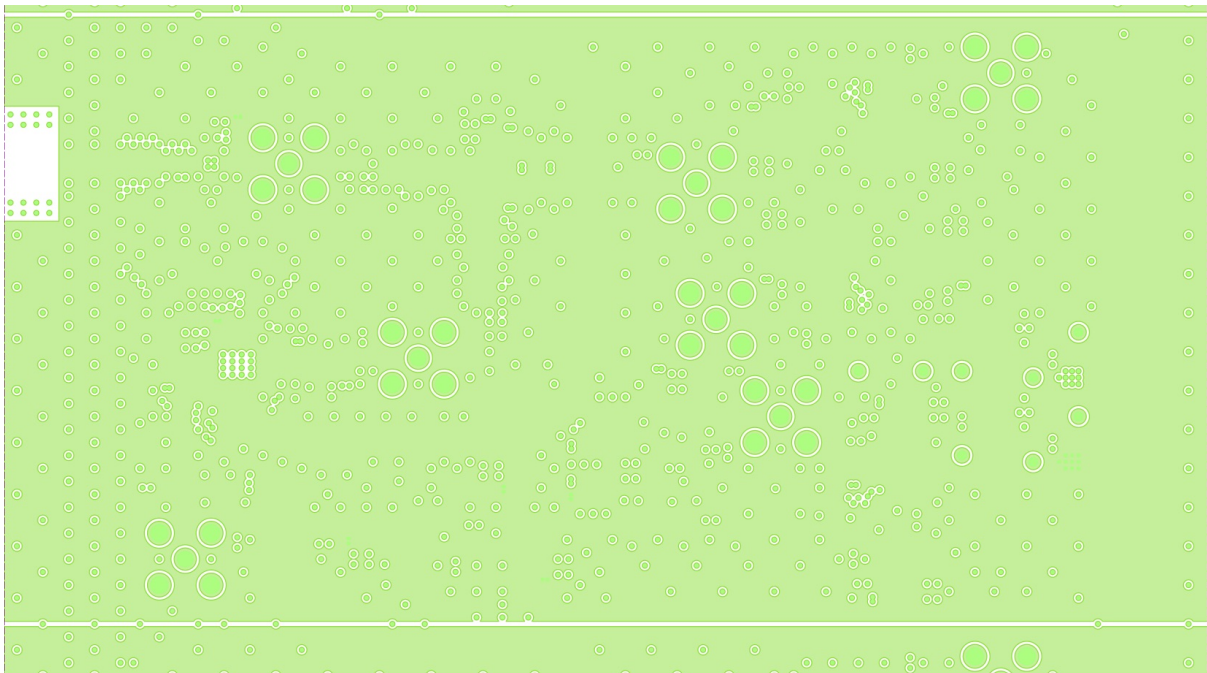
DLL-HPC received signal beamformer PCB layout for element 1 inner layer 2
